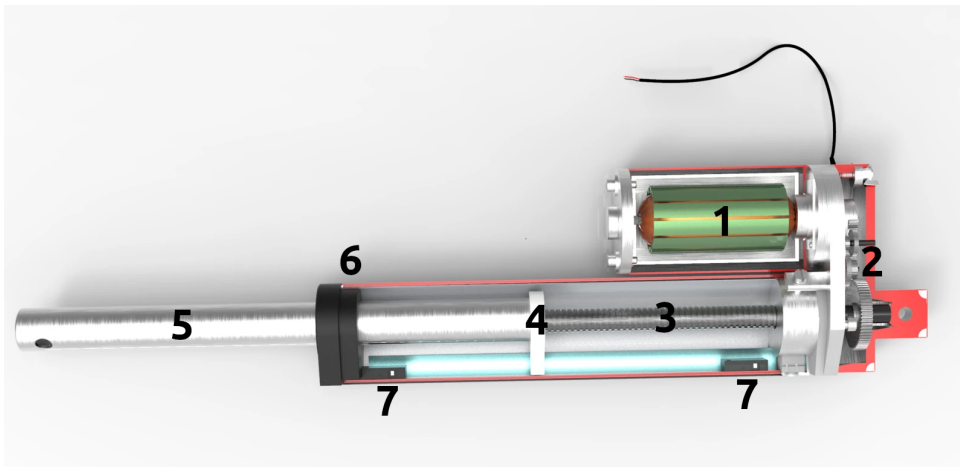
Typical EMA construction - 1 DC motor, 2 gearbox, 3 lead screw, 4 drive nut, 5 cover tube, 6 actuator cover, 7 limit switches [13]
